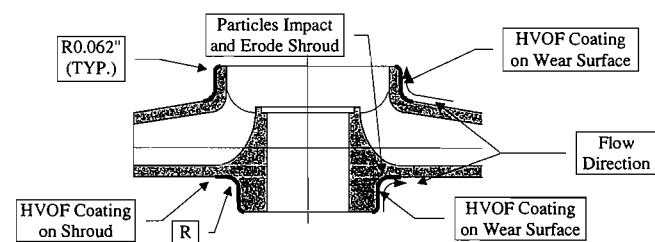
HVOF Coating of Integral Impeller Wear-Rings.
